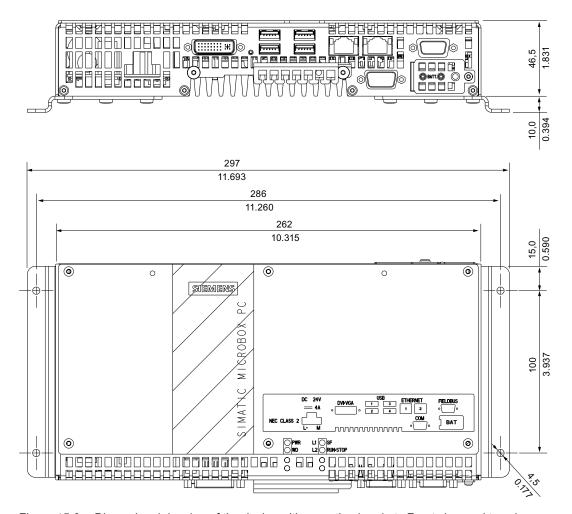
Dimensional drawing of the device with mounting brackets Front view and top view
